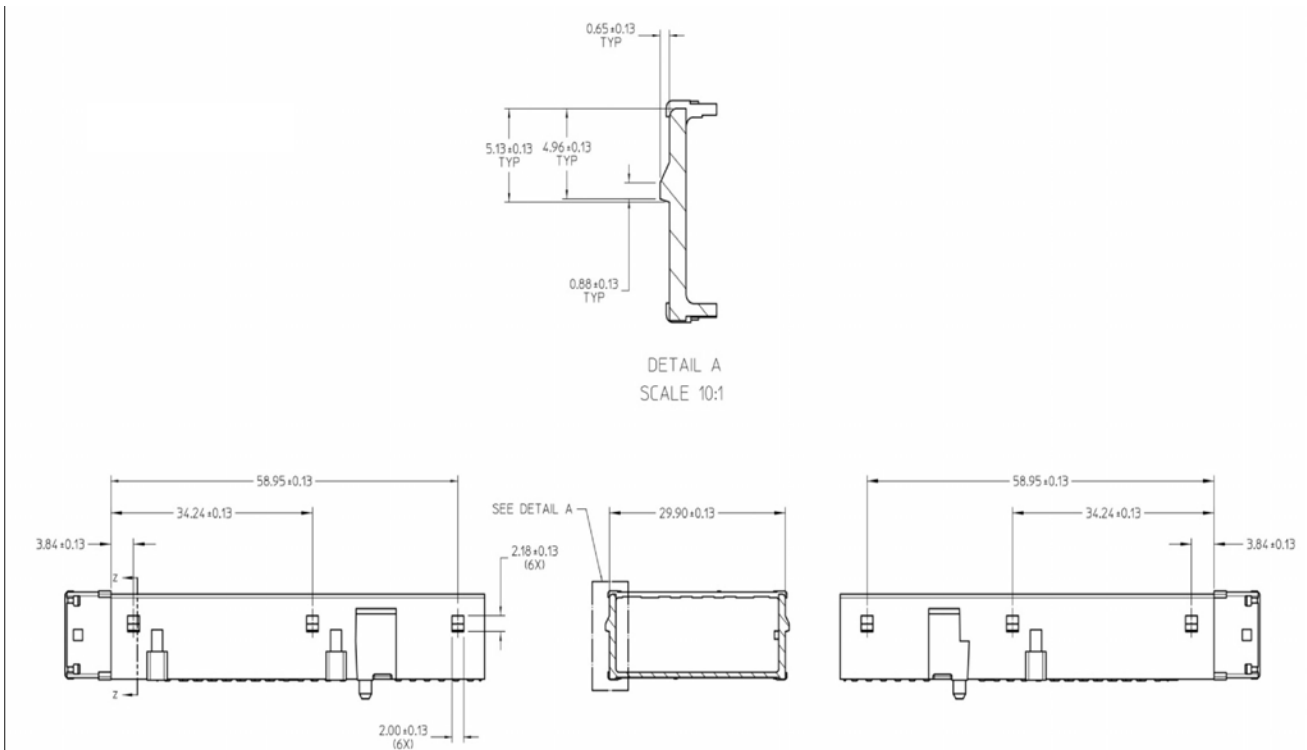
CDFP Style 1 Latch dimensions for heat sink clip
